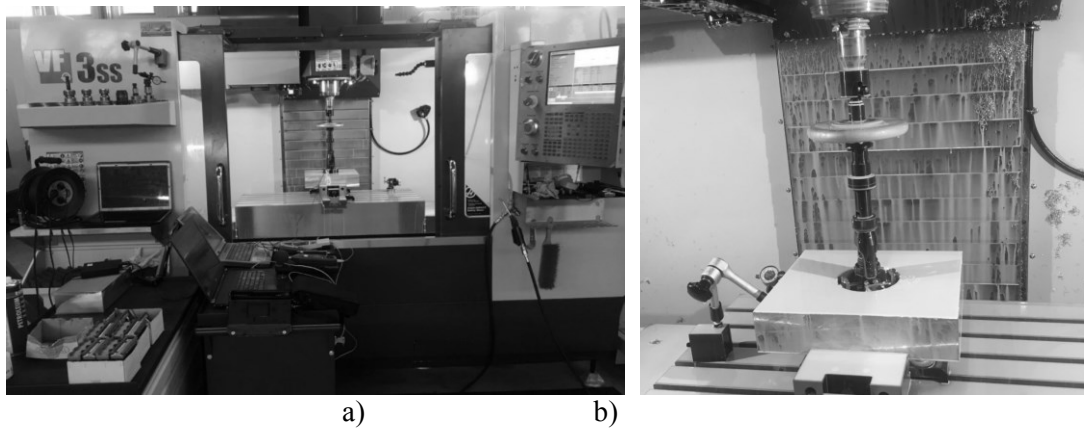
Research stand: a) Haas VF 3SS vertical CNC milling machine; b) equipment of Honingtec for honing
